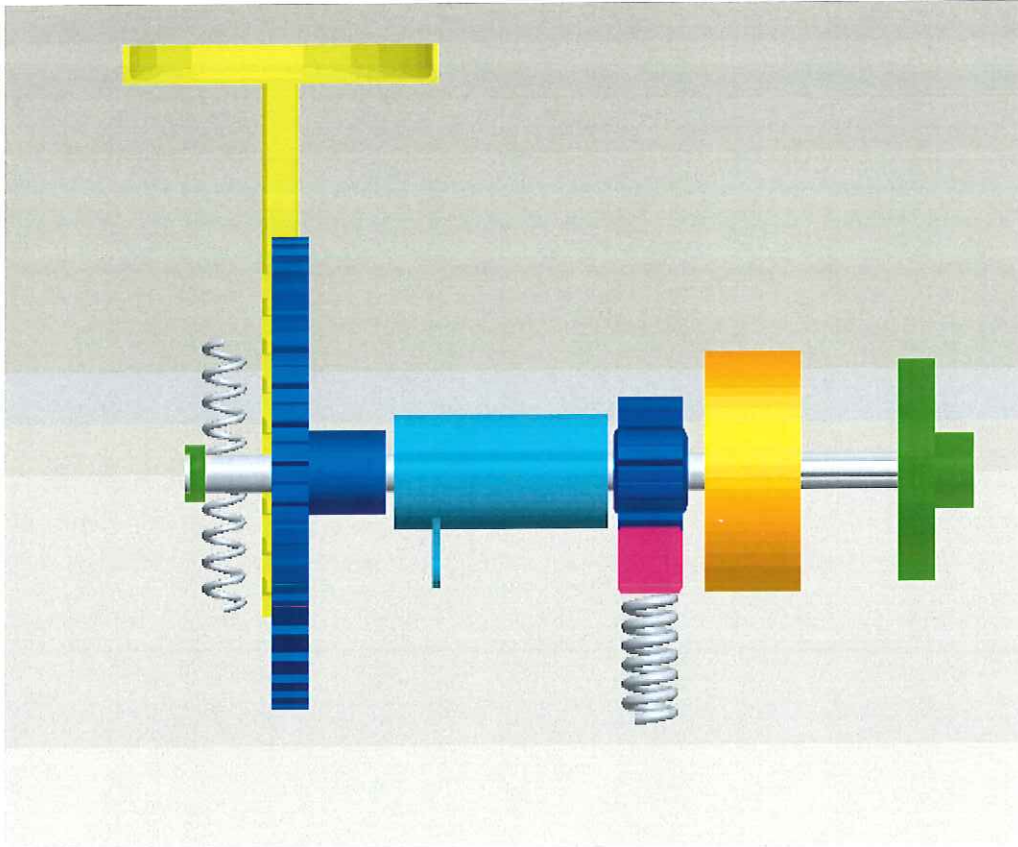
Pro/E drawing of the starter design showing internal components. Housing material is not shown in the figure for illustration purpose.
